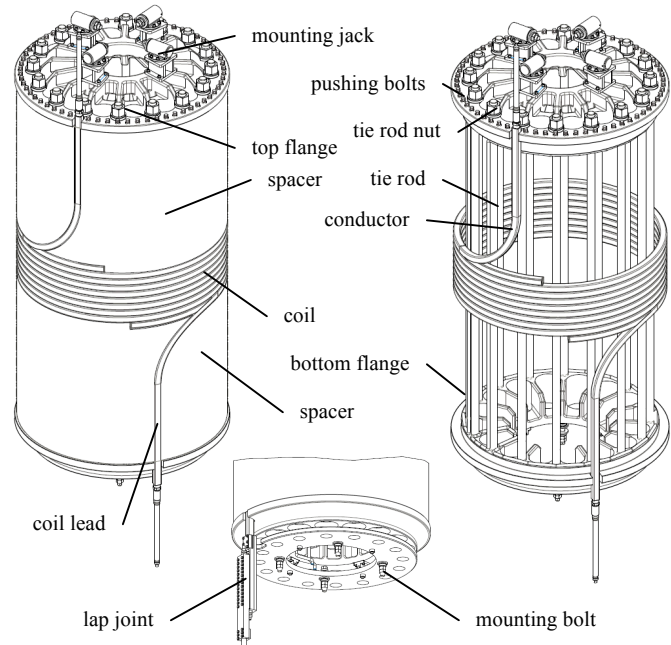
CSI assembly on the left: assembly with wraparound insulation removed; on the right: spacers are also removed to show support structure. Mounting details and lap joint are shown at the bottom
